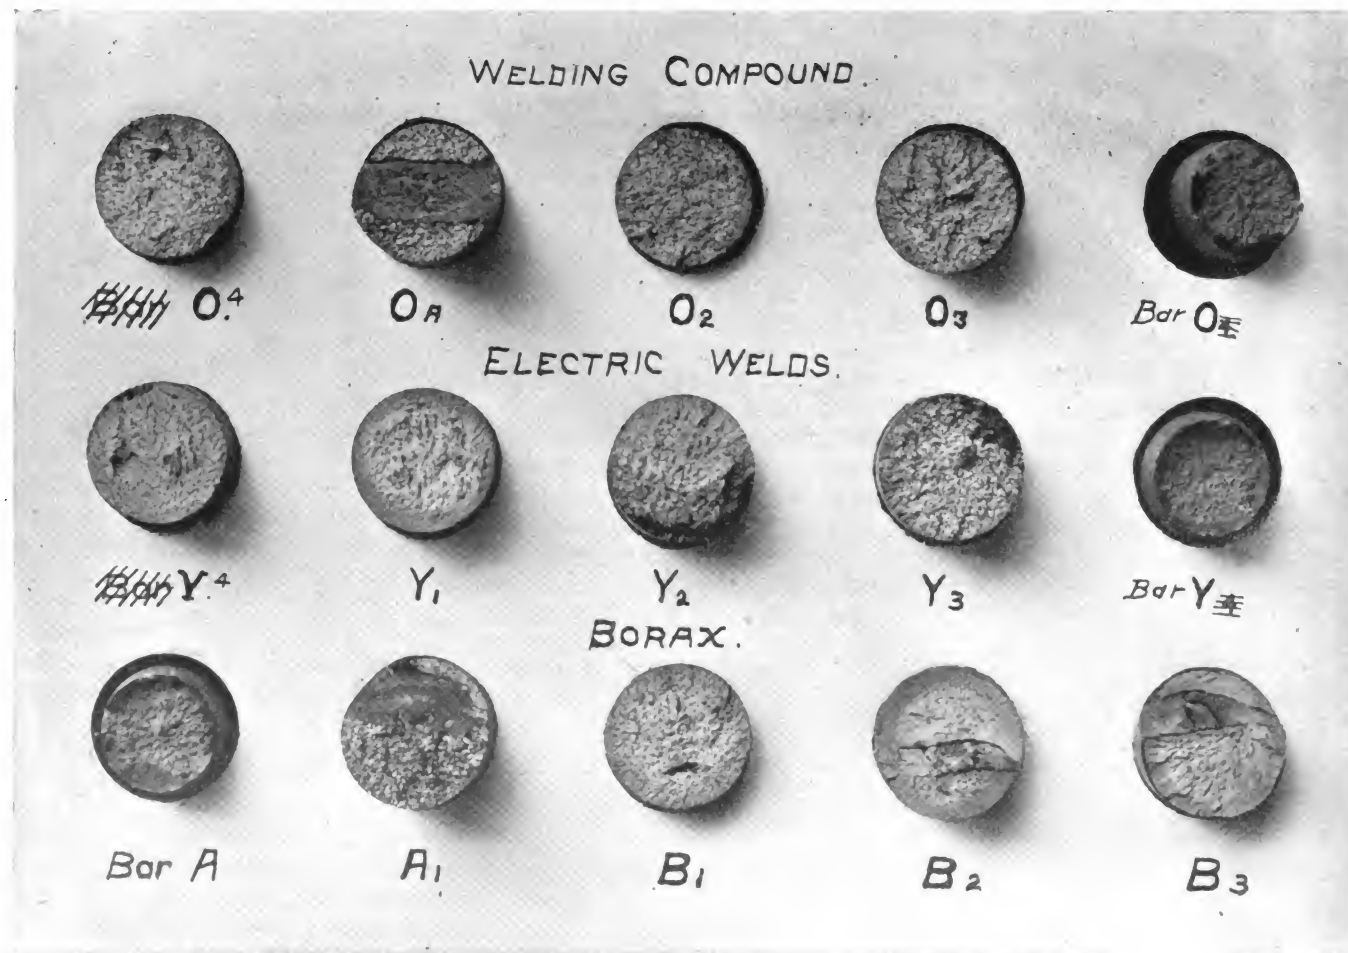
SHOWING SAMPLE SET OF FRACTURES OBTAINED BY BREAKING PIECES IN TESTING MACHINE
